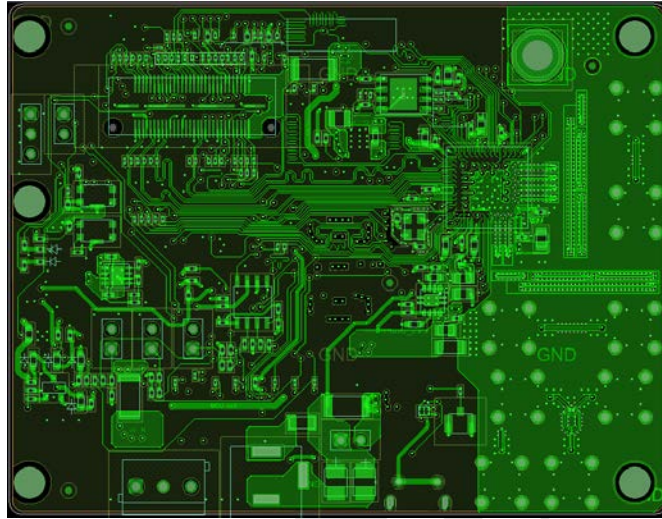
IWR1642 RF Probe Test Board – Allegro PCB Top Layer View
